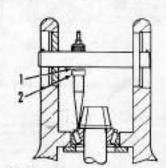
View showing proper use of special tool CAS-1234 and location of gap (1) to be measured. Spacer (2) thickness is determined by tool manufacturer according to model being ser-
